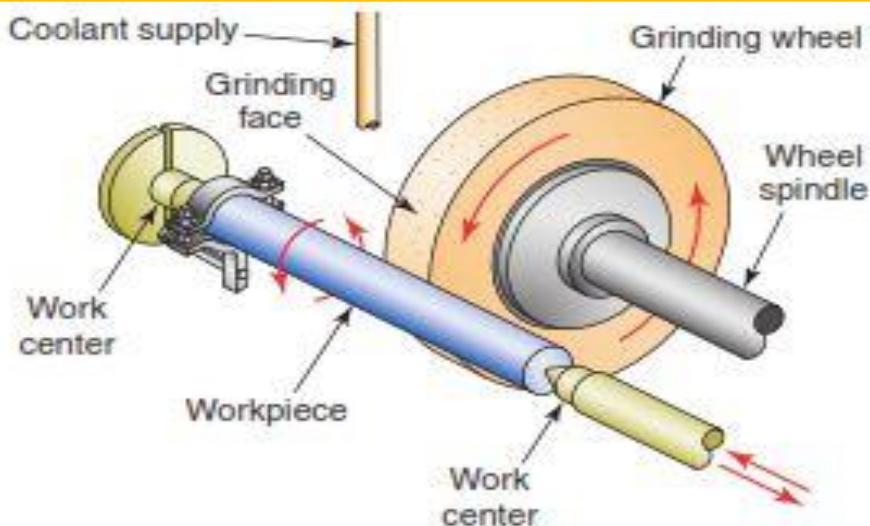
Sketch of center-type cylindrical grinder set up for traverse grinding. Note particularly the direction of travel of the grinding wheel and the workpiece, and the method of rotating the workpiece.
